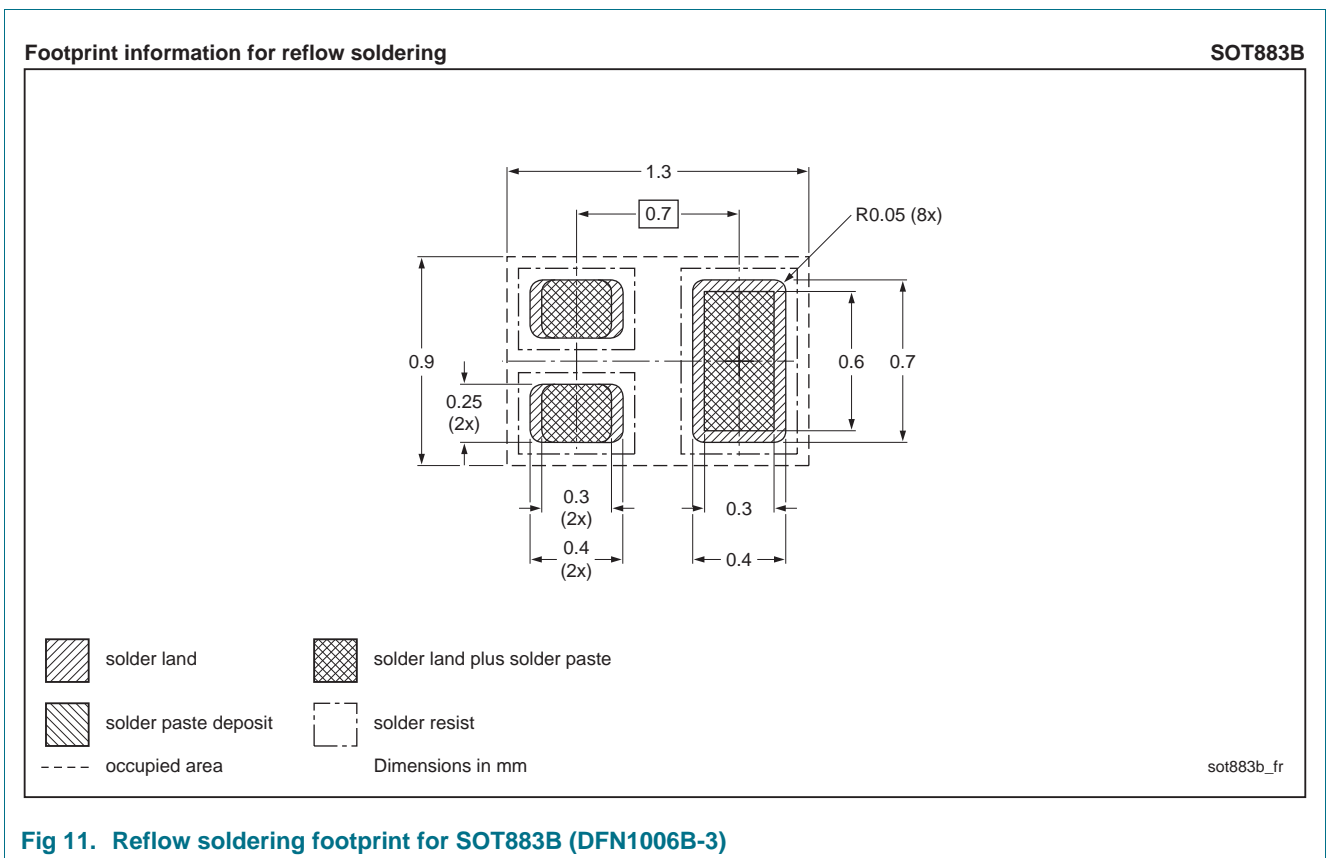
Reflow soldering footprint for SOT883B (DFN1006B-3)
